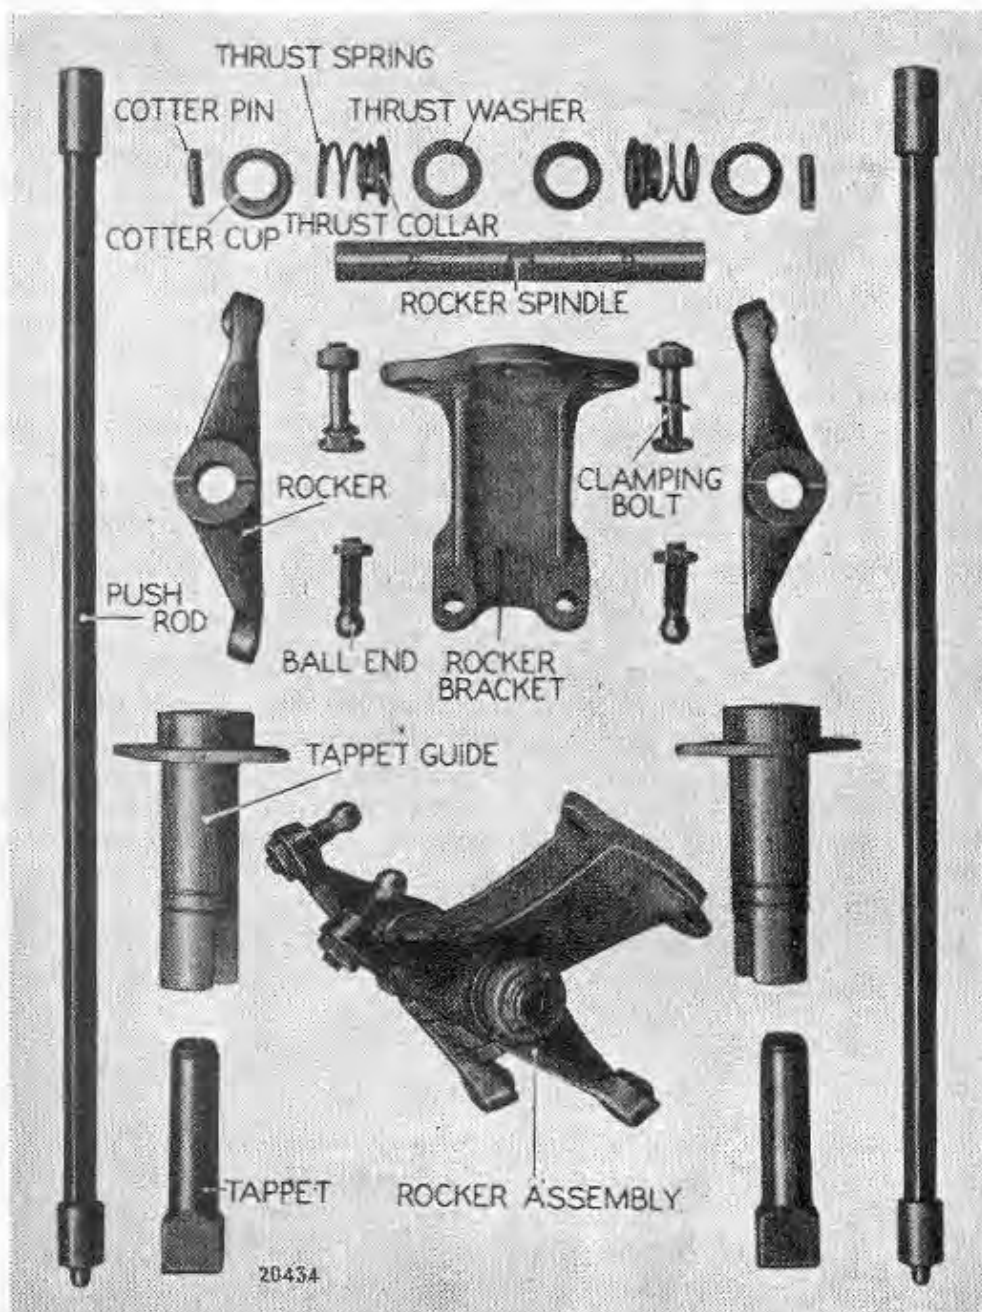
Old-type steel push-rods, tappets and guides, and rocker mechanism
